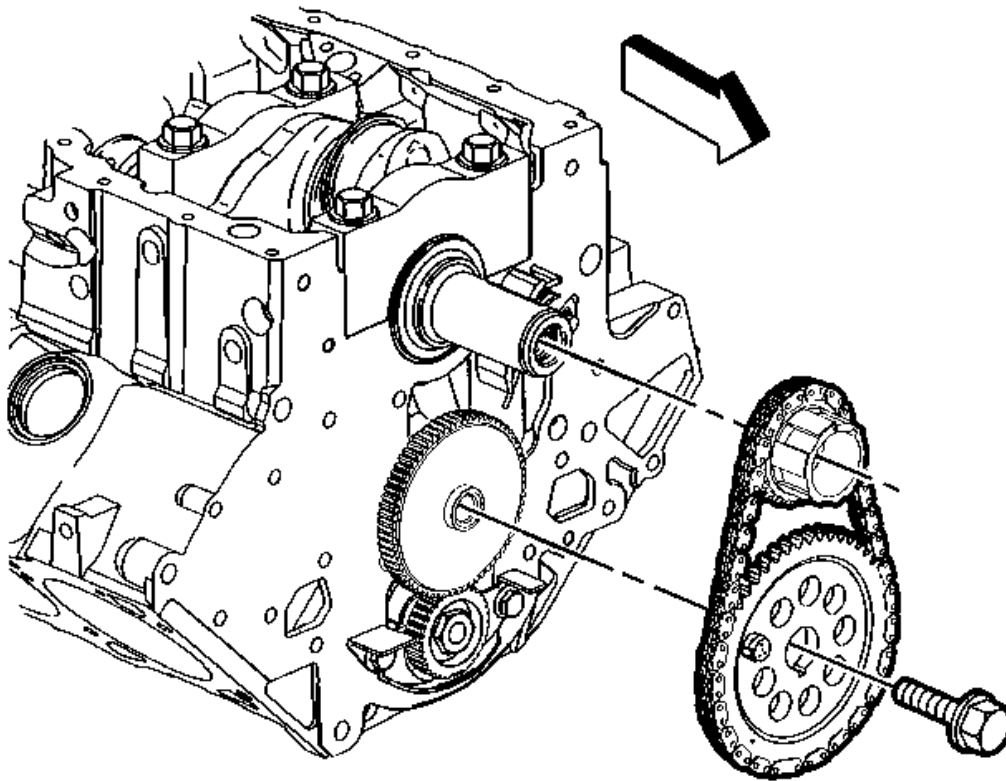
Removing Timing Chain & Crankshaft Sprocket (L36)
